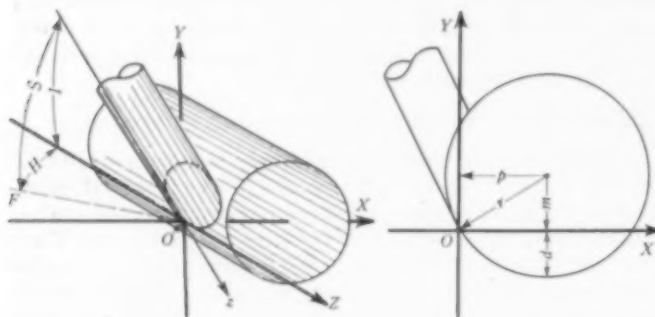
PRINCIPAL AXES, THREE-DIMENSIONAL VIEW
